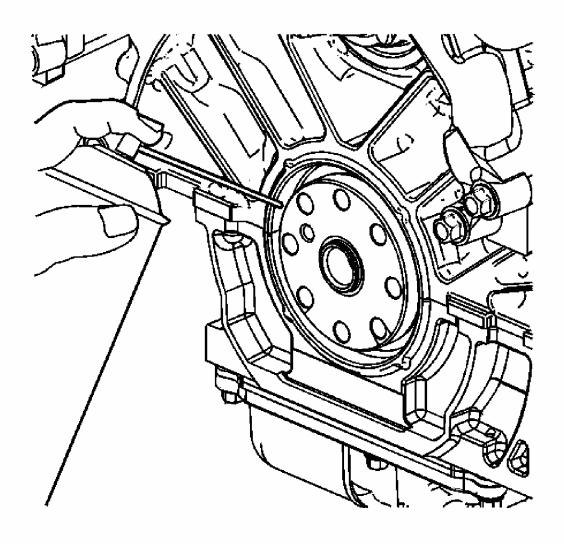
Cleaning Rear Crankshaft Seal Bore Courtesy of GENERAL MOTORS CORP.
